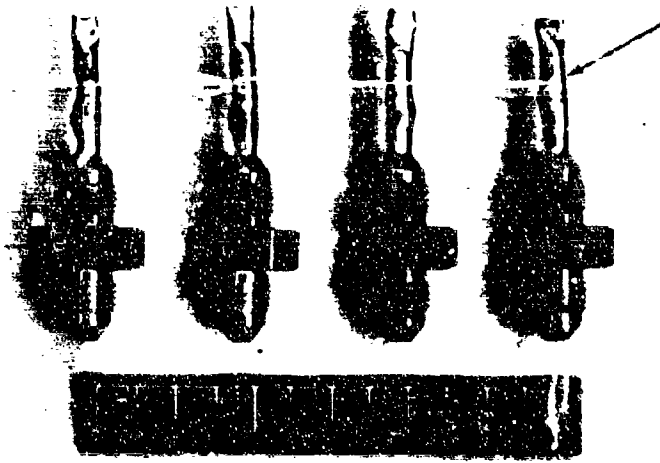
Typical 317 Stainless-Steel Test Specimens With 0.002-Inch Nickel Sheet Patch (Arrow) Brazed Over 0.050-Inch Hole in Tube. Hydrostatic Pressure Test Failure Occurred in Adjacent 0.011-Inch Tube-Wall Material
